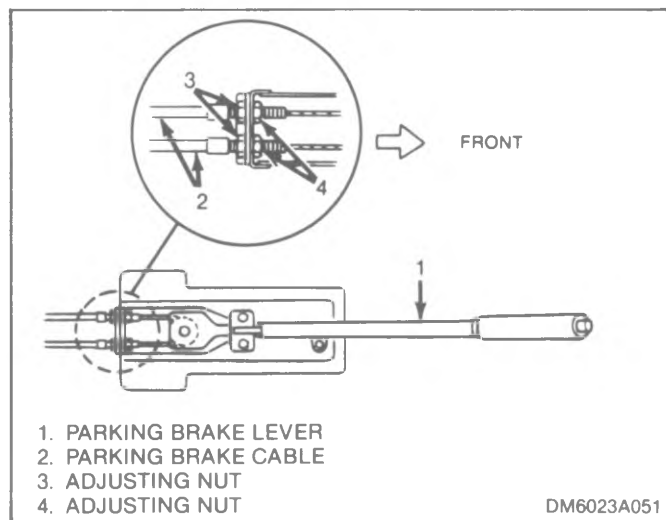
1985-86 Sprint Parking Brake Adjustment
